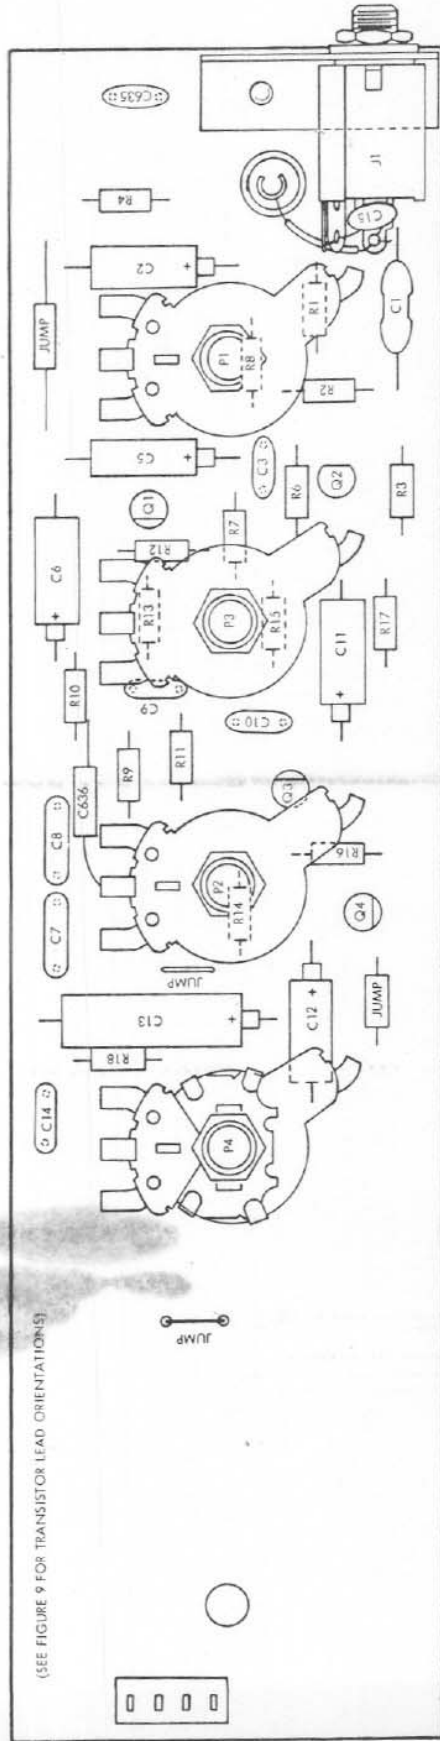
Electronic Part Locations (3D038-2), Channel Preamp and Tone Control Amplifier PCB Assembly
